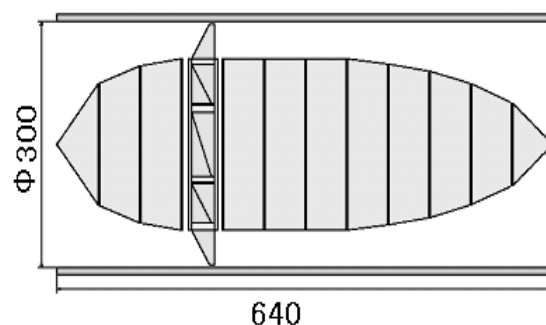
Cross-sectional drawing of a wind generator with an inner-taper shroud
